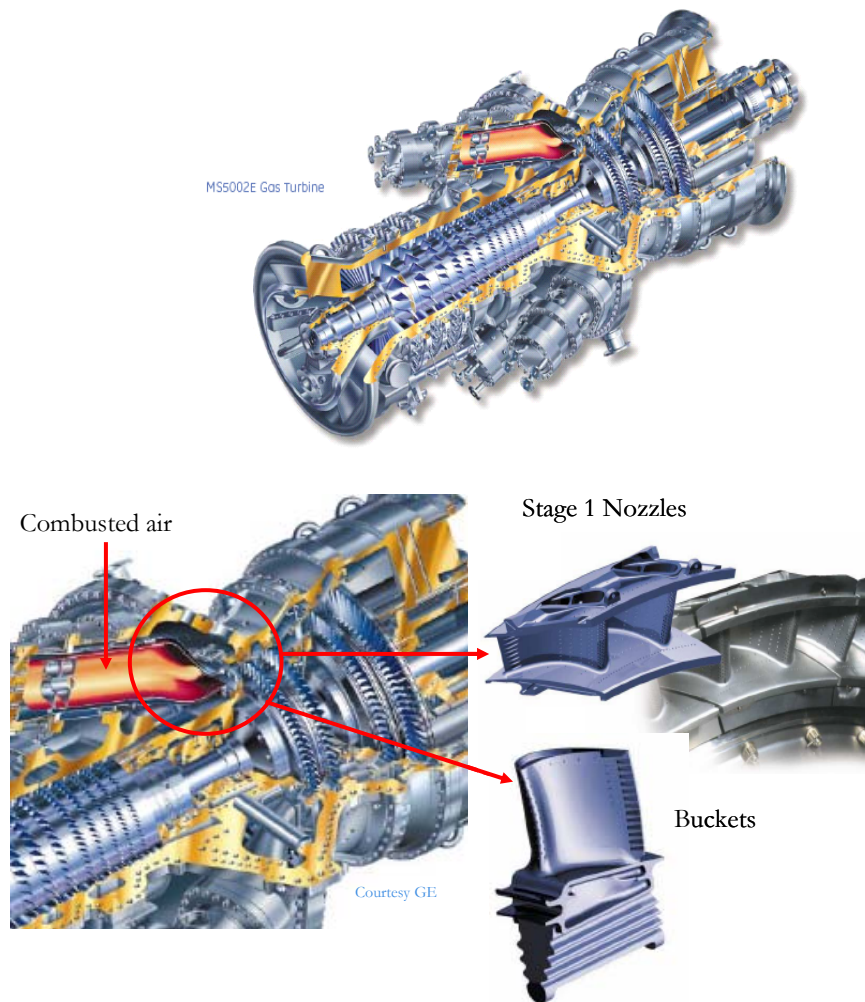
MS5002E gas turbine and first stage detail (Courtesy GE)
